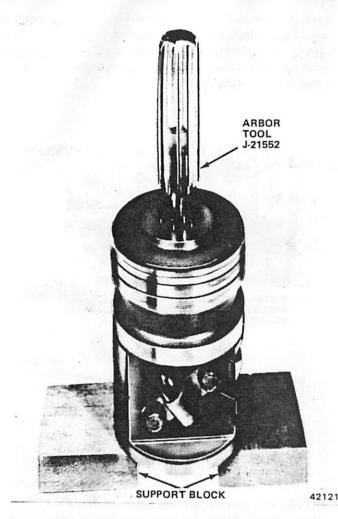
L-35 Arbor Tool Installed in Rack Piston
